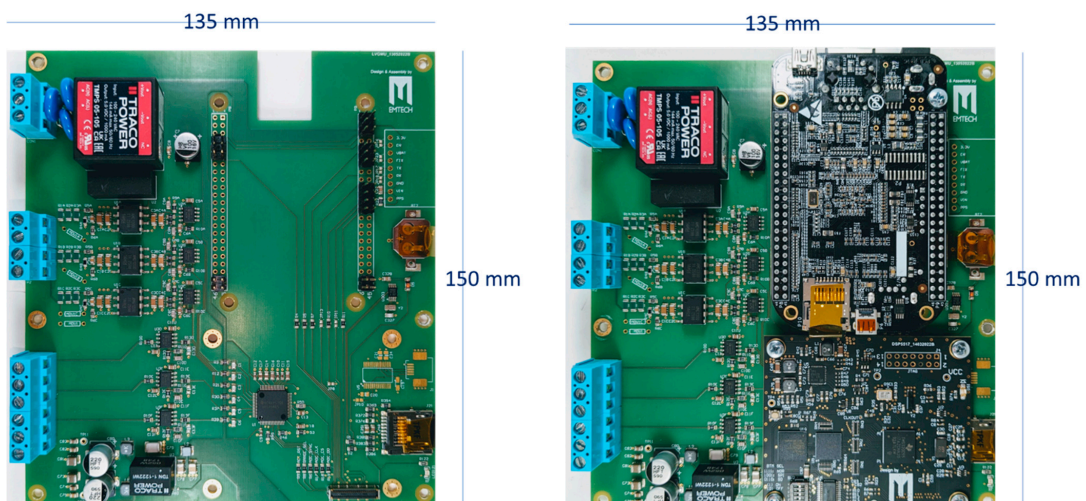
Implementation of the main board. Left: The main board. Right: The main board along with mounted DSP and EDGE processing units.
